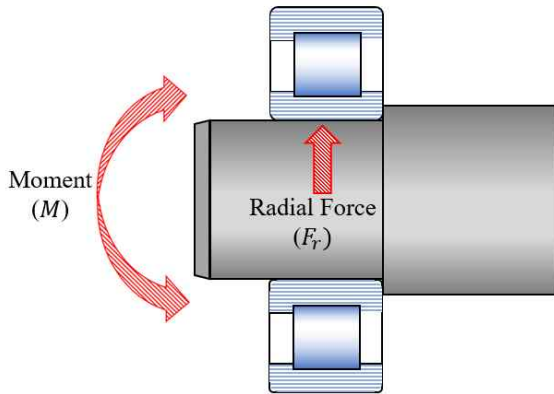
Radial force and moment acting on cylindrical roller bearings
